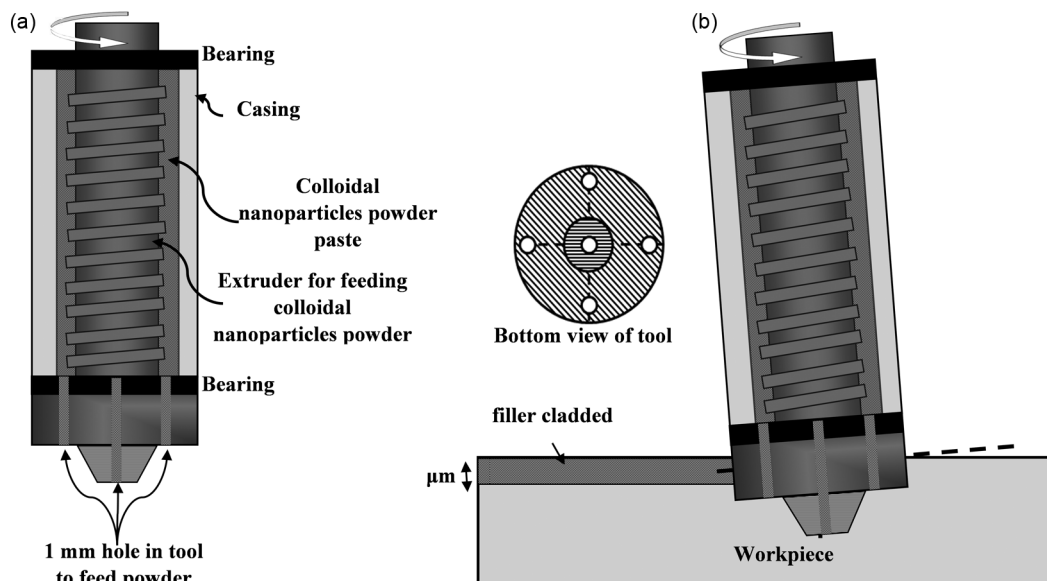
(a) Tool geometry, and (b) Additive powder fed friction stir processing (APF-FSP).
